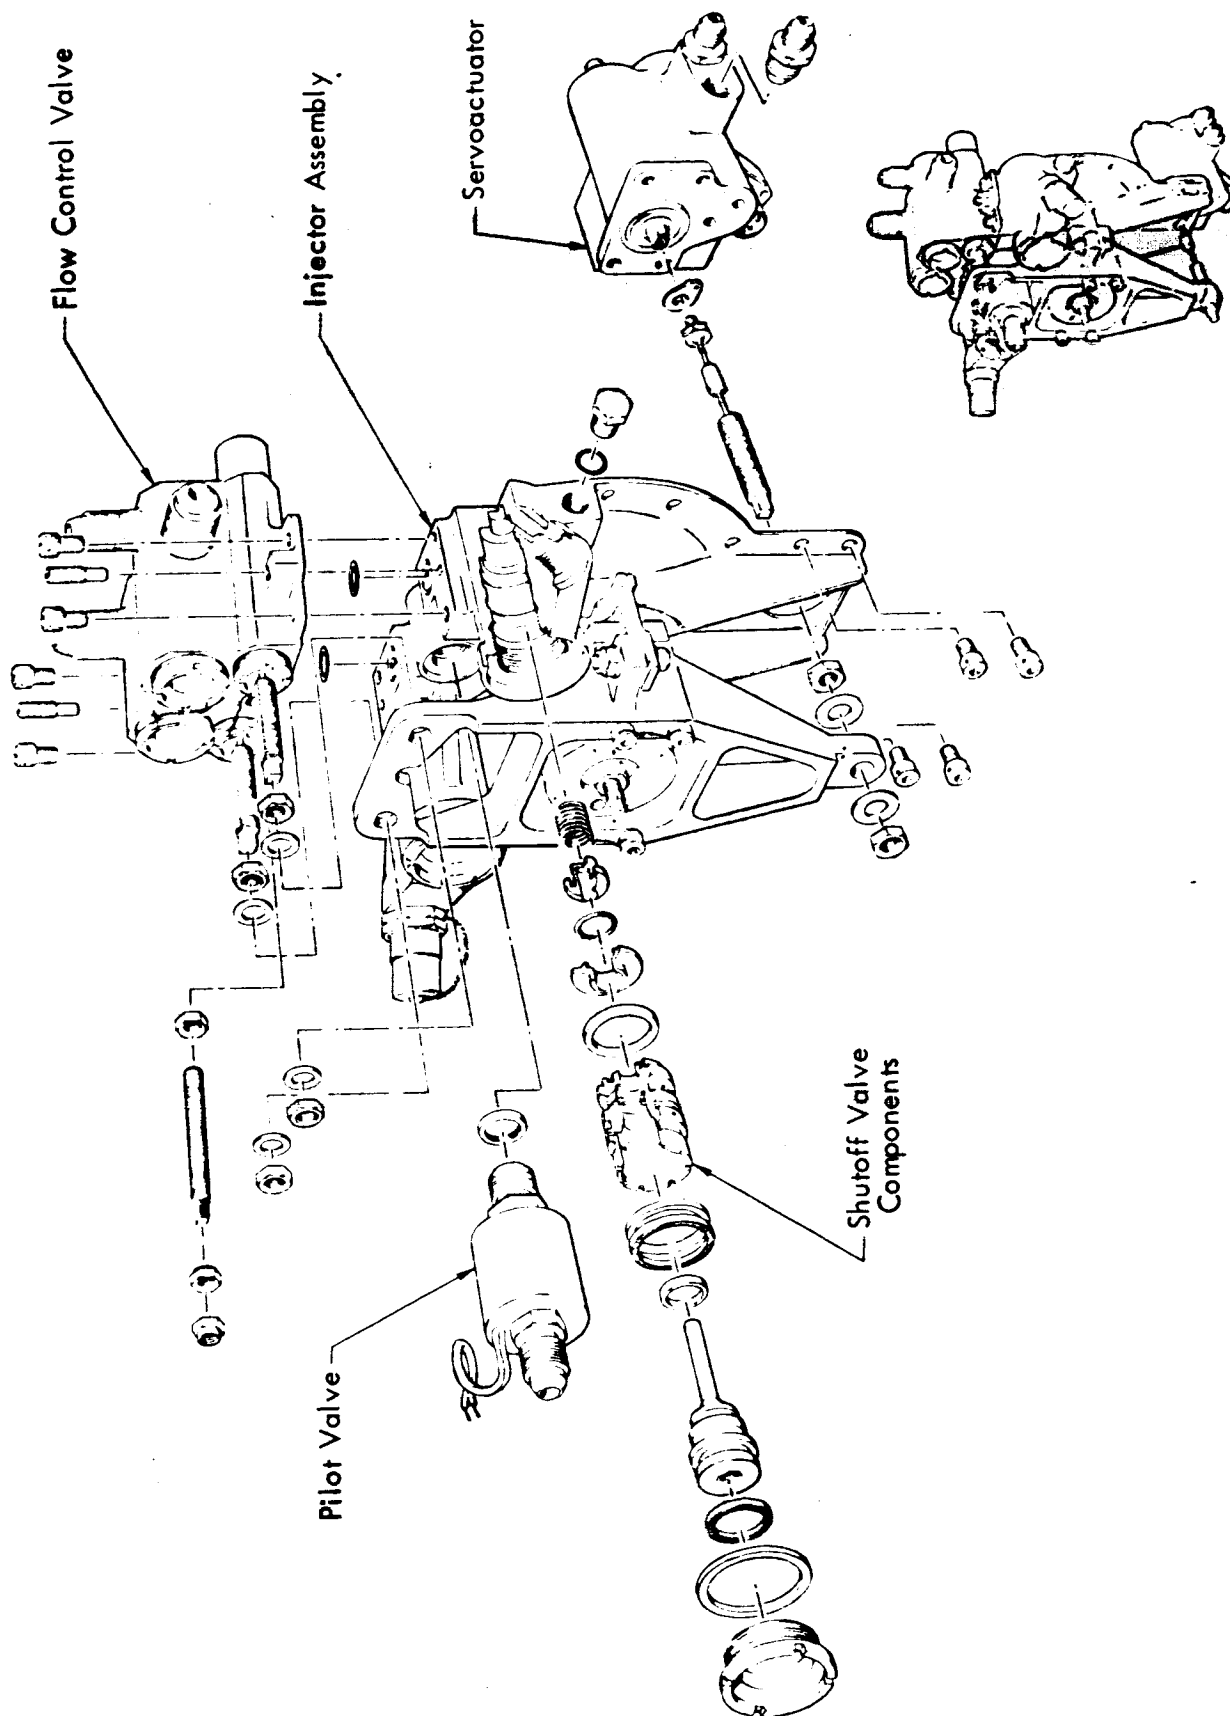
NIRA 150A HEA (Exploded View)
